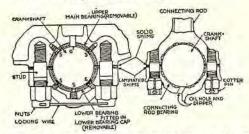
(left). Main bearings lubricated by force feed. Fig. 5A (right). Connecting-rod lower bearing lubricated by splash. Both fitted with shims. See page 799 for adjustment of Reo "T6" connecting-rod.
